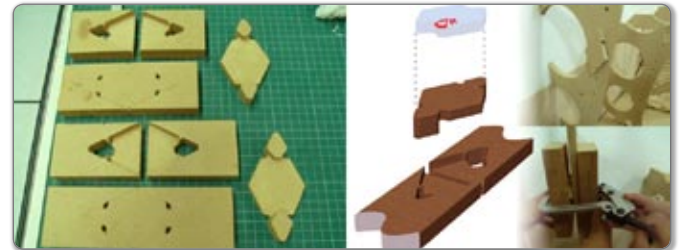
Left: joints of the tree column pillars. Right: the assembly of these joints.
